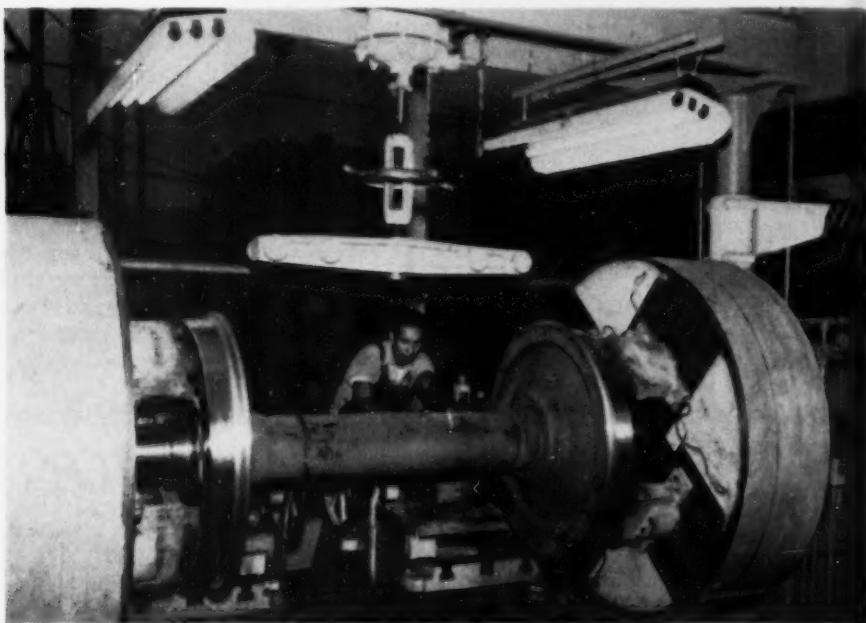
Illustration showing new 52-inch lathe designed for use in the re-turning of rail car wheels.
